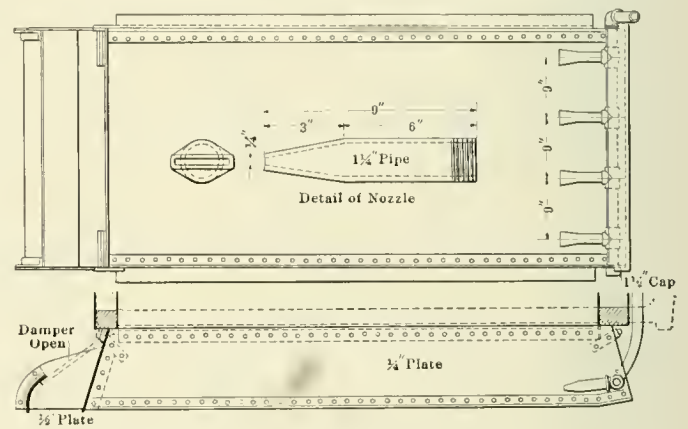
SHALLOW ASH PAN WITH BLOWERS—ILLINOIS CENTRAL RAILROAD.
